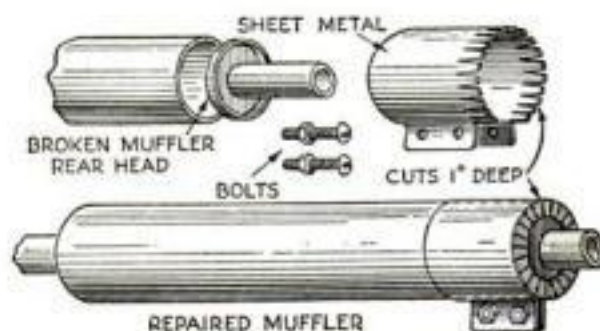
A blown-out muffler rear head can be repaired with sheet metal cut and fitted as shown
